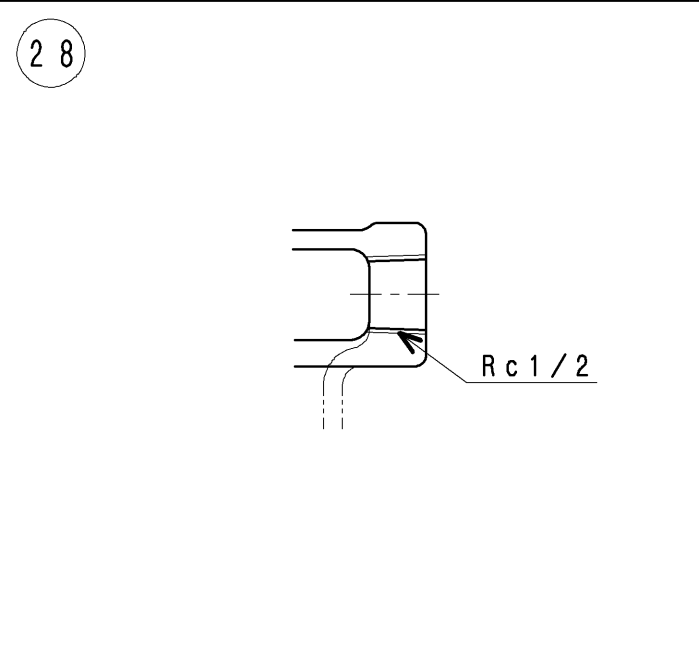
DETAIL OF FUEL LEAKOFF PIPE ADAPTER
